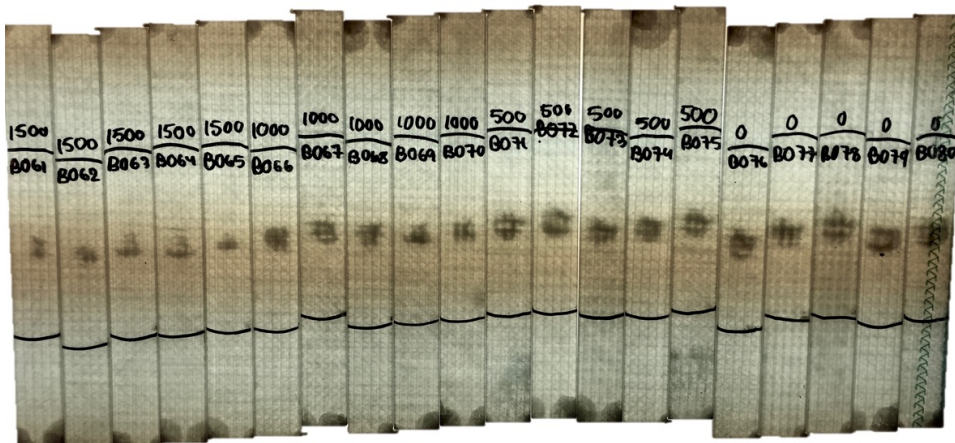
Visual inspection of impact damage size using backlight, Laminate B.
